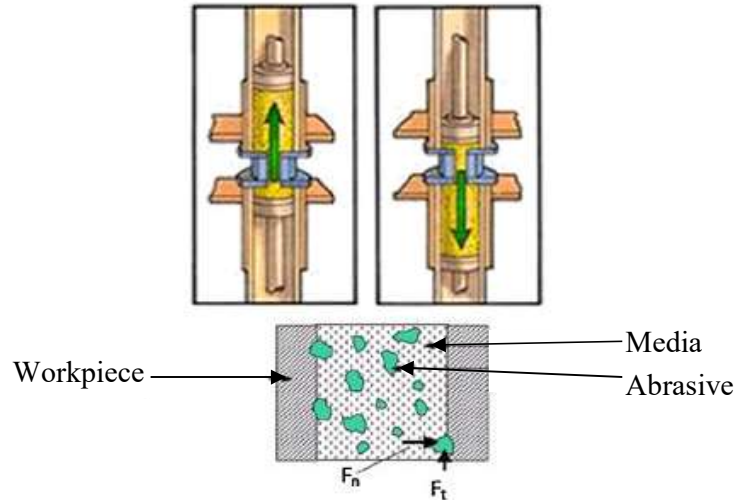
Mechanism of abrasive flow machining (AFM)[8]
